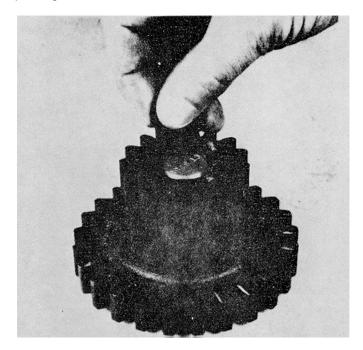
B-21. Installing Bearings D. Place spacer (08) in gear, Figure 11 B-22.
